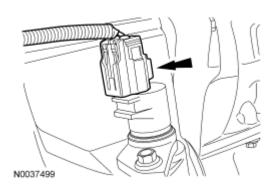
Locating Backup Lamp Electrical Connector Courtesy of FORD MOTOR CO.
